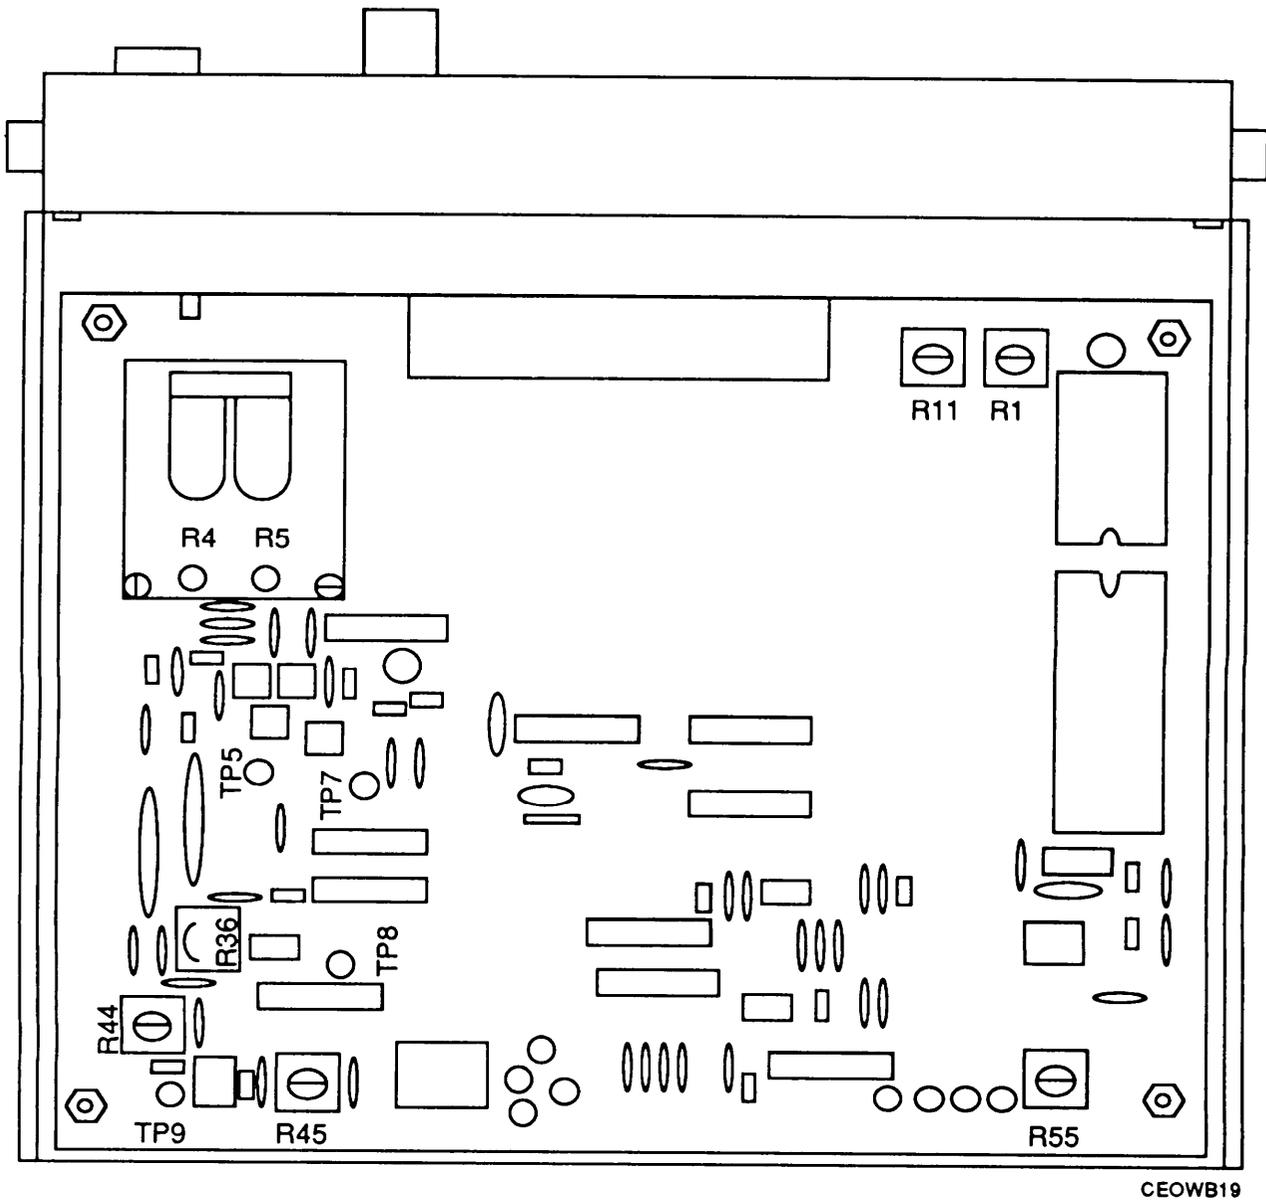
Input Board and Chopper Assembly Test Points and Adjustments
